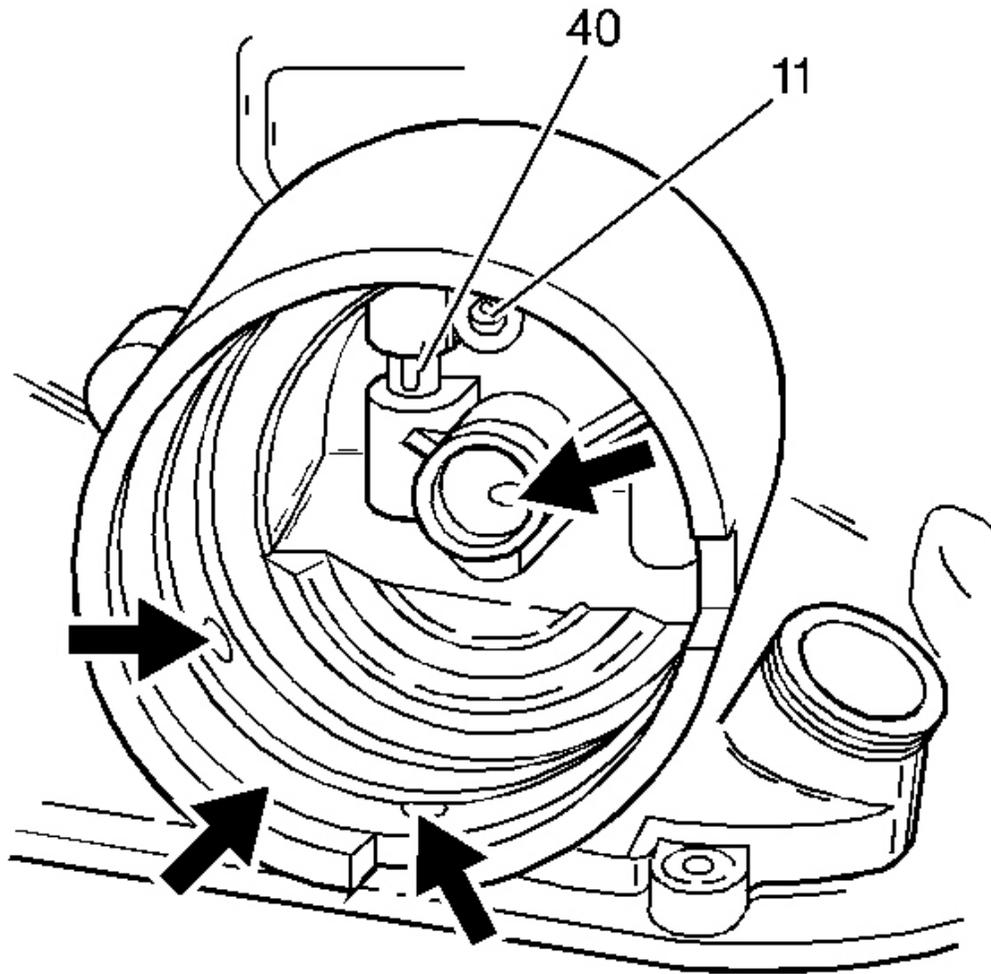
2-4 Servo Bore, 3rd Accumulator Retainer & Ball Assembly, Orifice Cup Plug & 2nd Apply Piston Pin Bore
